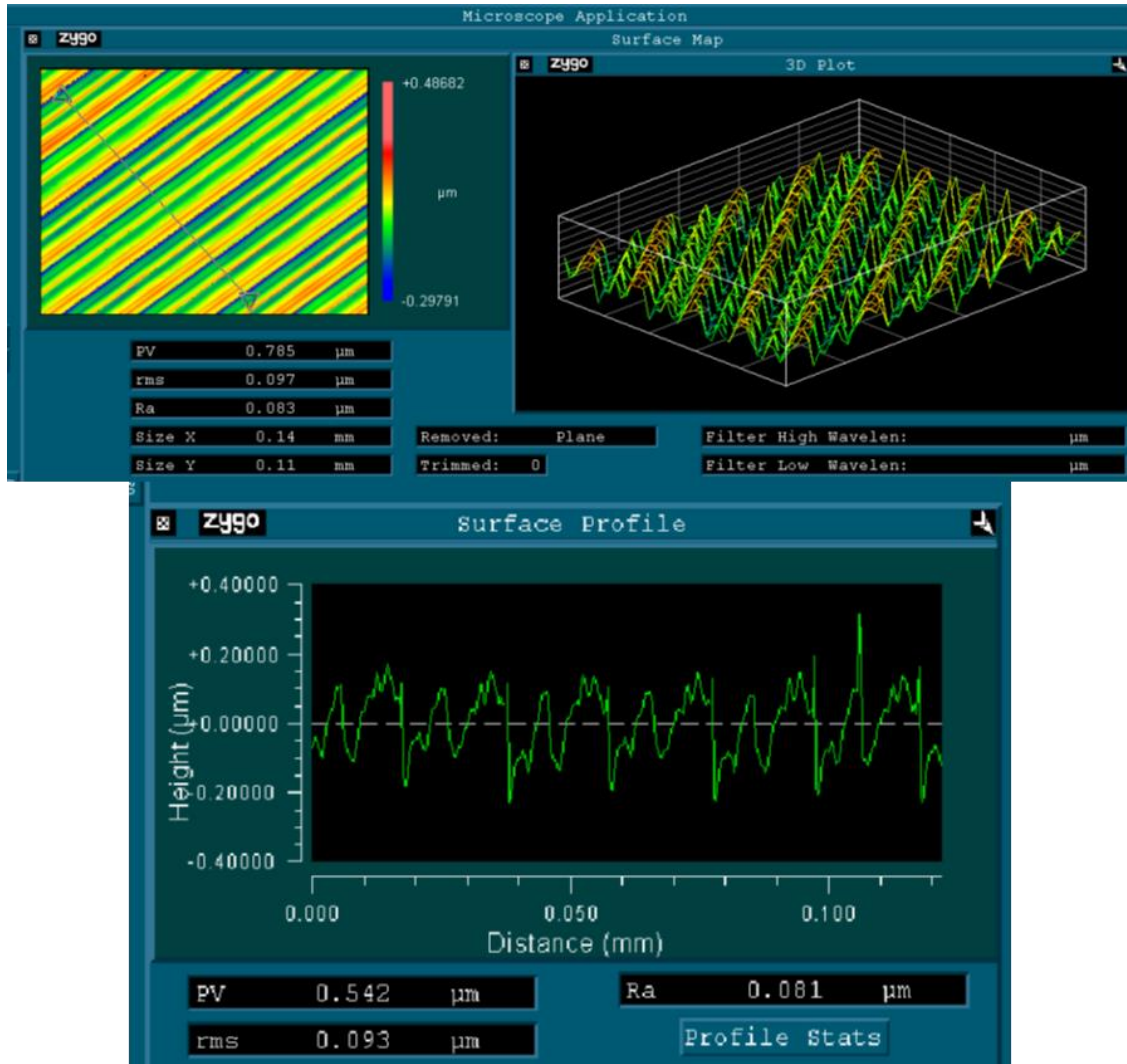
SWLI measurements showing the surface finish of the diamond milled freeform surface.
